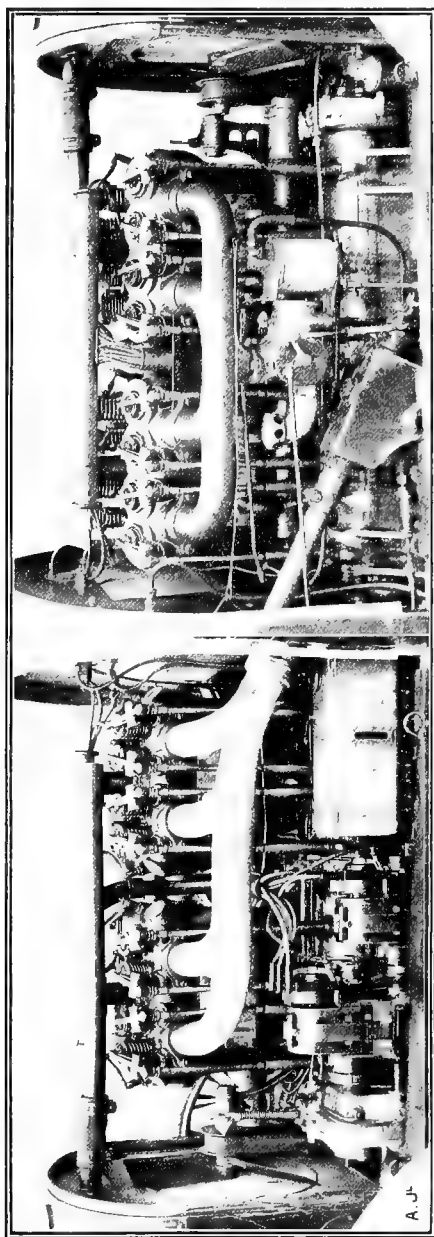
Benz Racing Engine, with Two Inlet and Two Exhaust Valves to each Cylinder
